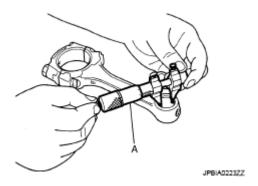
Measuring Inner Diameter Of Connecting Rod Bushing Courtesy of NISSAN MOTOR CO., U.S.A.
